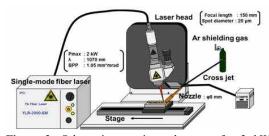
Schematic experimental set-up for 2 kW single-mode fiber laser welding of Al and Ti dissimilar metals.
